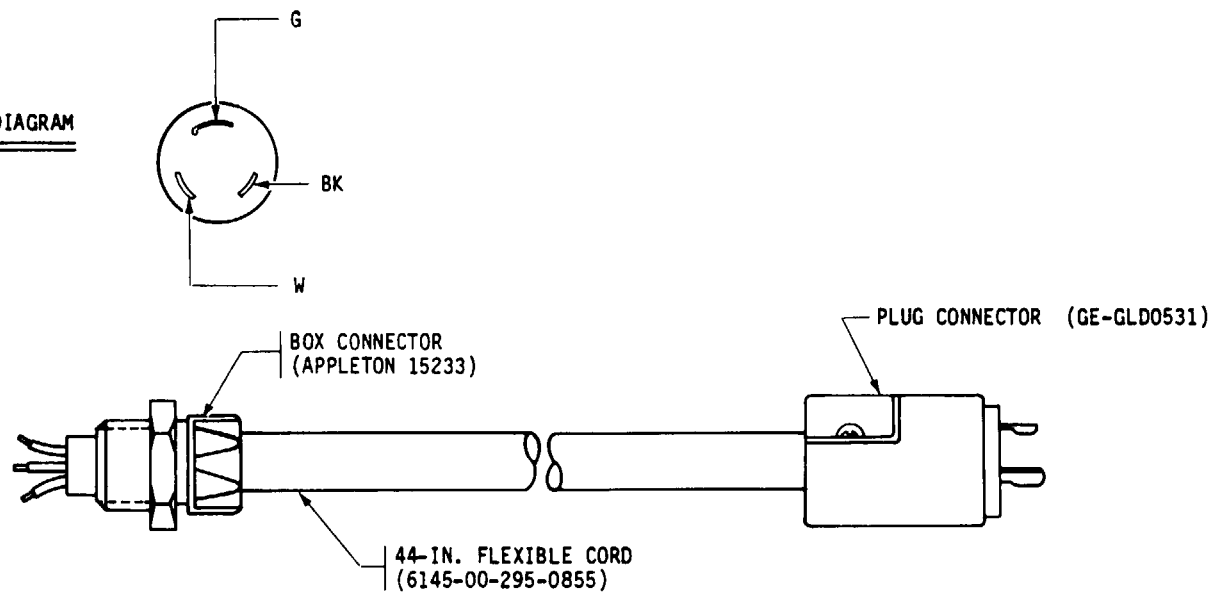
Power Cable Assembly, 11021164, Units 2 and 3, M35A2.
